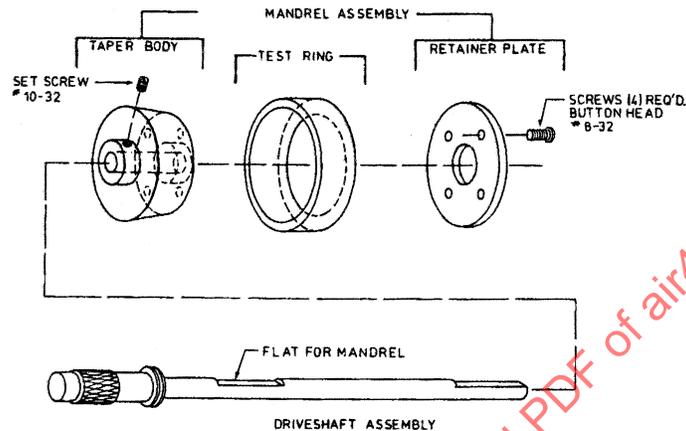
Ring and Mandrel Assembly (Cylinder)
